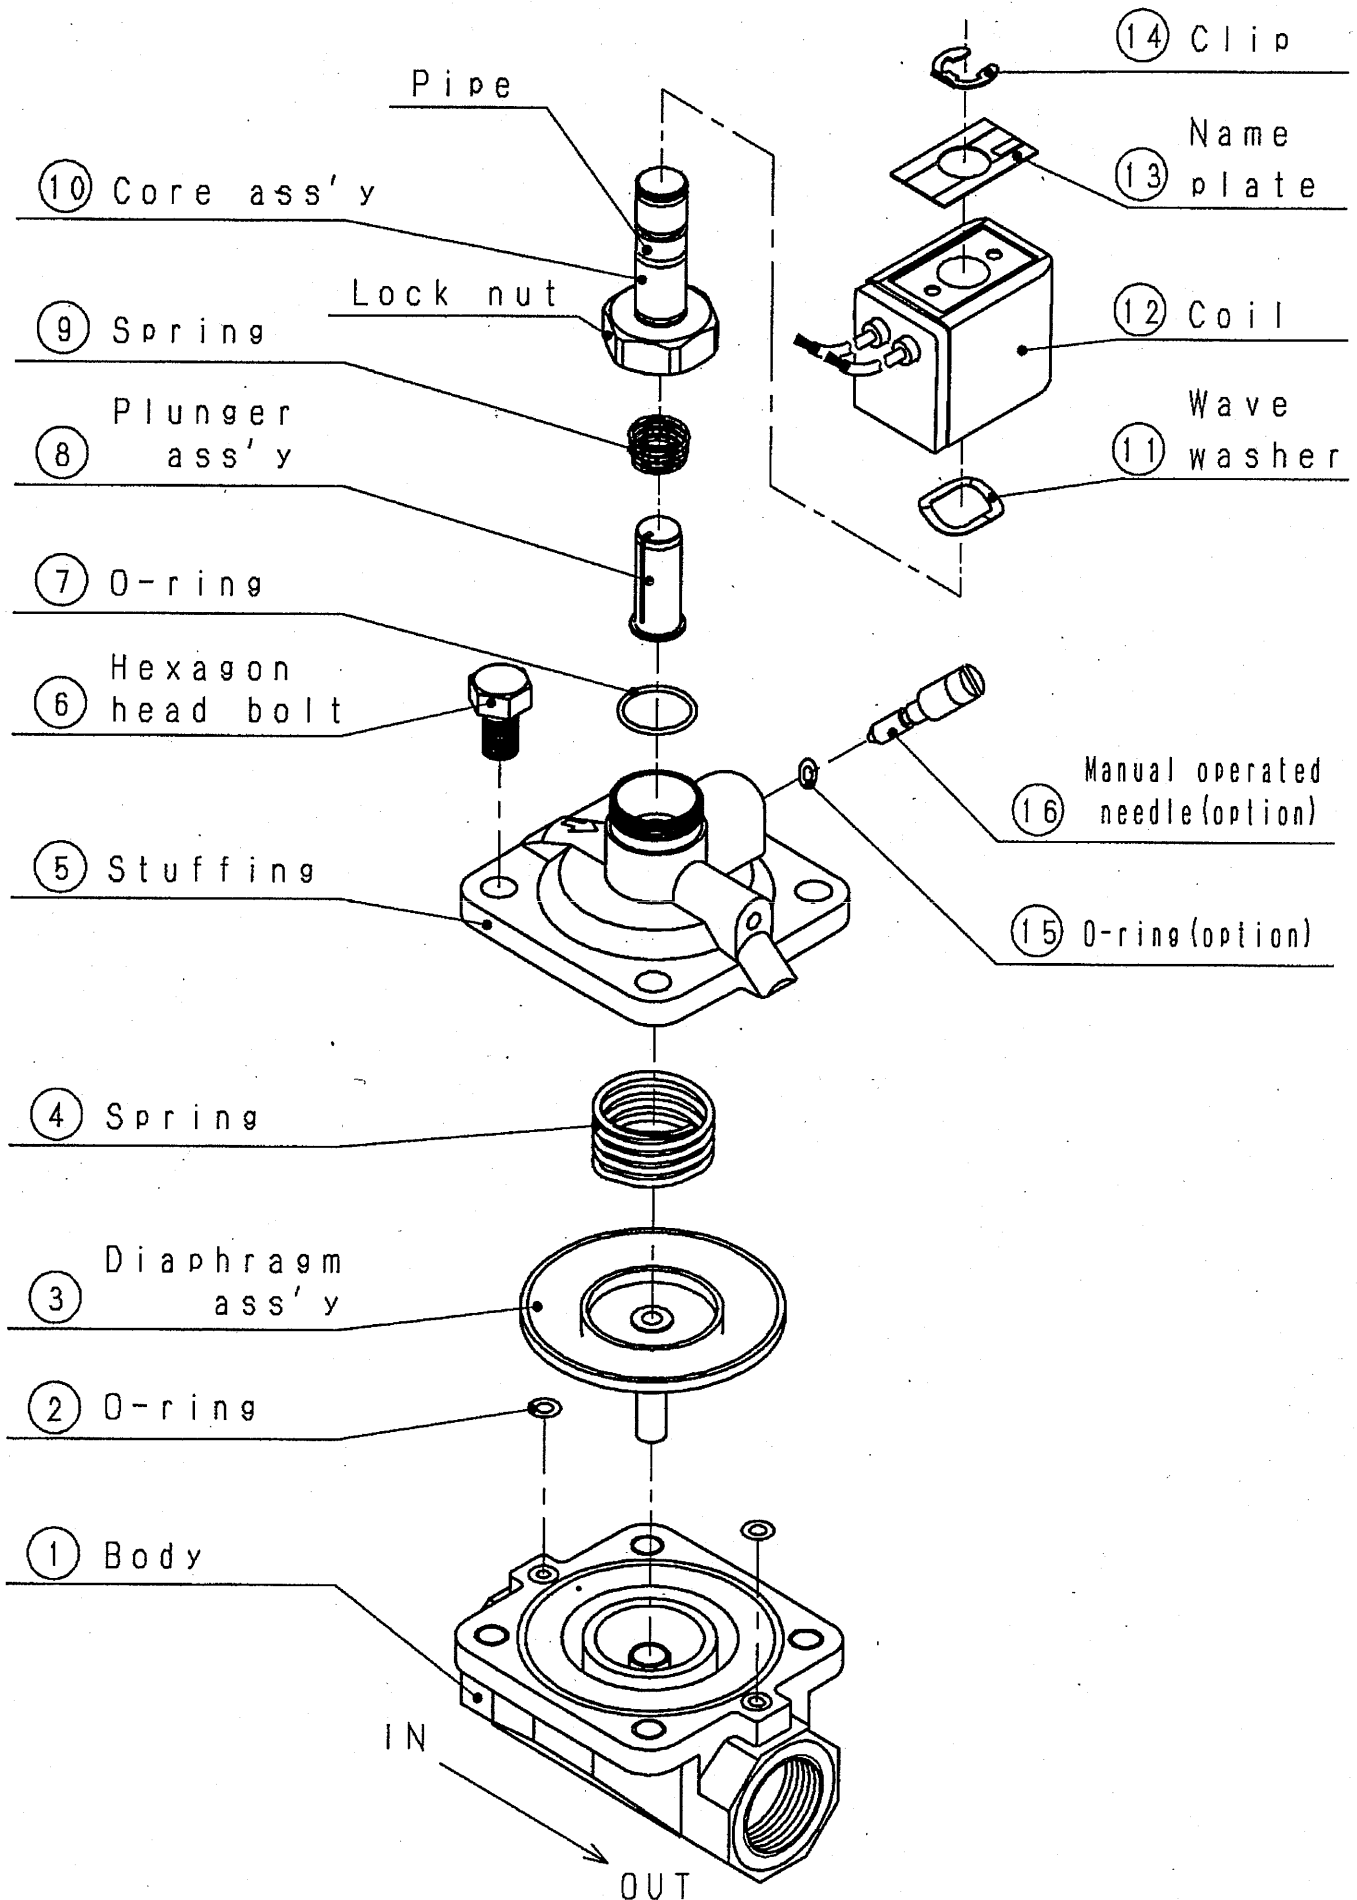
Disassembly drawing (Coil option symbol: 2C)
